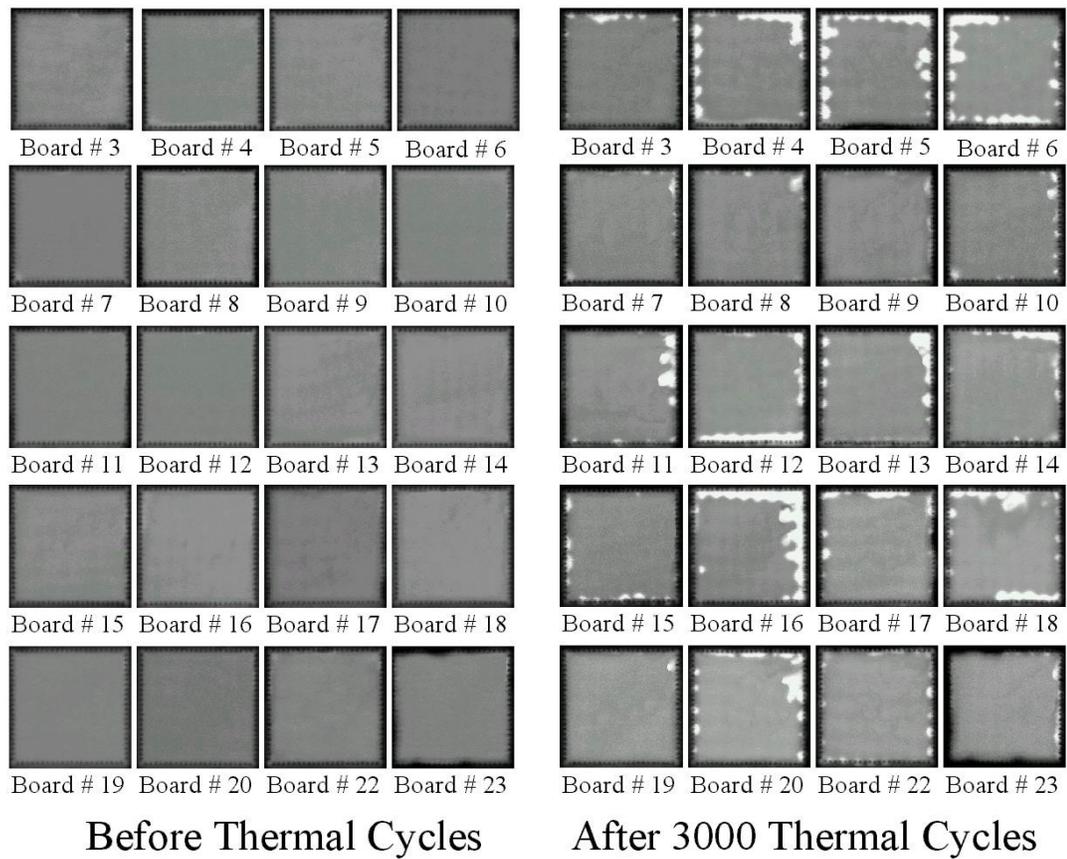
Initial and Final CSAM Images for the Flip Chip Assemblies with Underfill UF3
